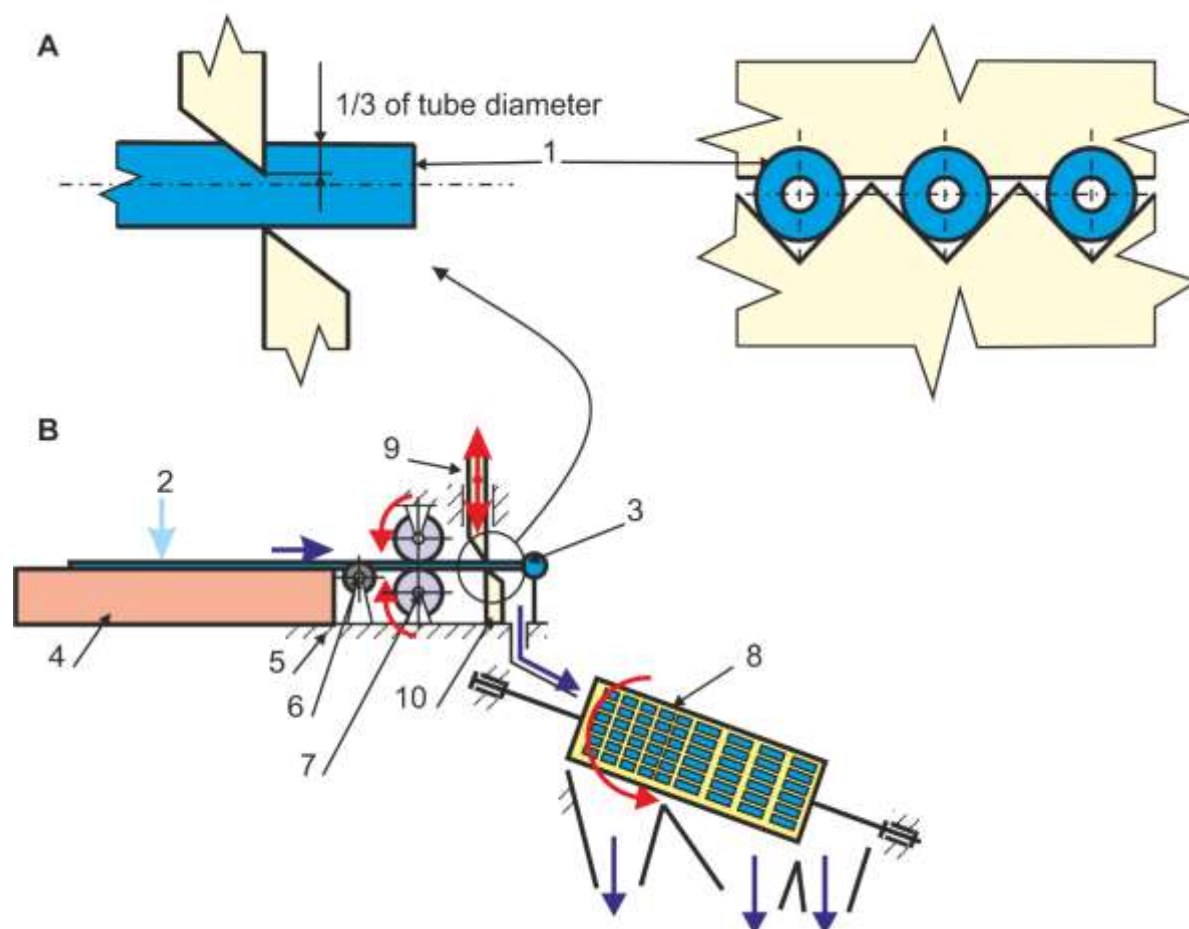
Diagram and principle of chopping machine: A - tube loading, B - machine diagram, 1 - tube, 2 - pressure on tubes by hand, 3 - stop in the form of a roller, 4 - table, 5 - machine frame, 6 - roll with grooves, 7 - hard rubber rolls, 8 - screen to separate the chopping product from the cullet and long tubes, 9 - movable knife, 10 - fixed serrated knife
